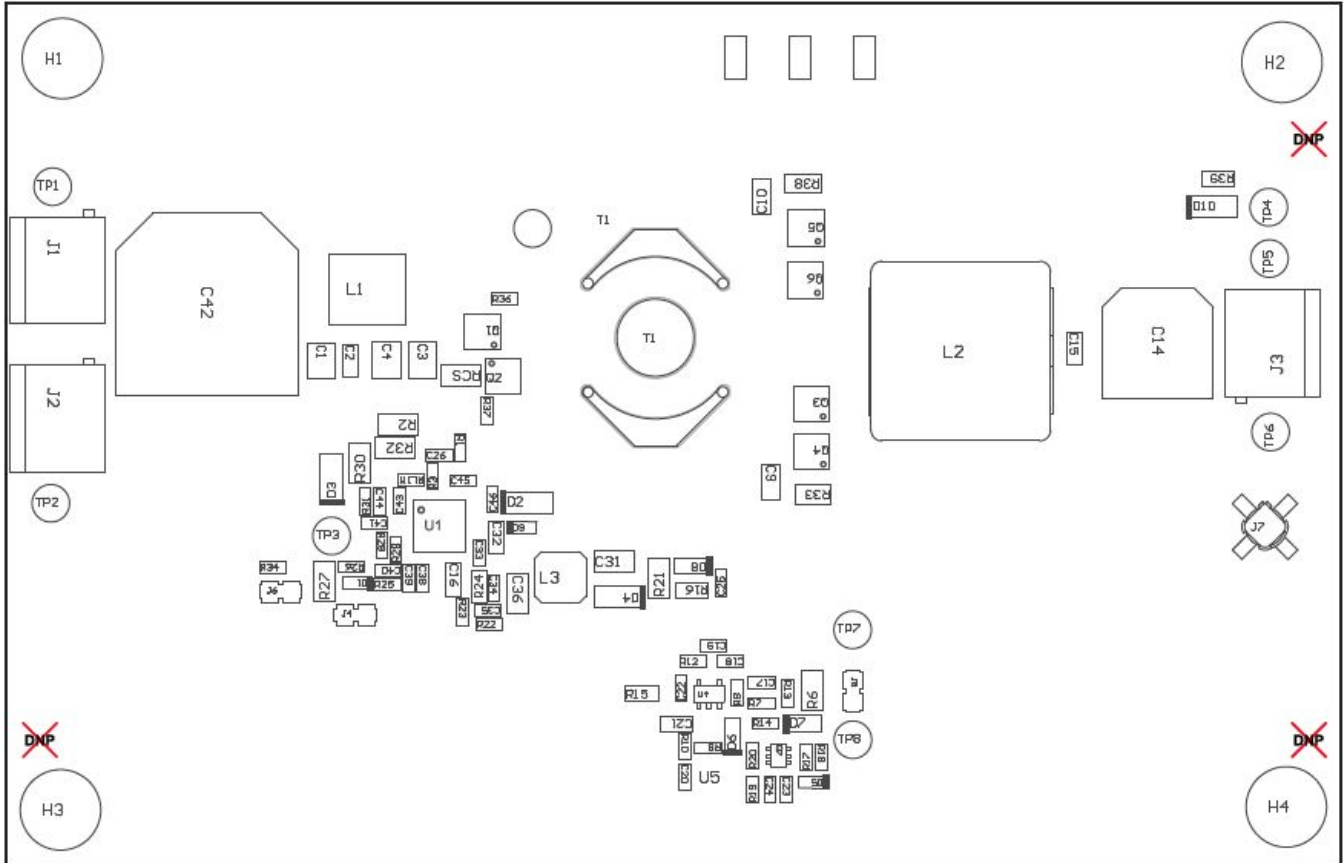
LM5036 EVM: Top Layer PCB Assembly File
